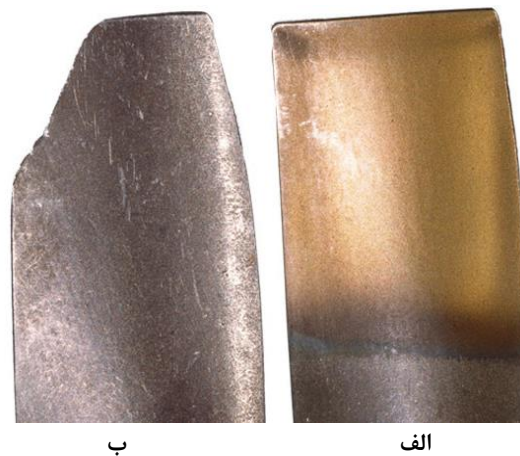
Compressor blade; a) coated blade with TiN, b) uncoated blade [1]
